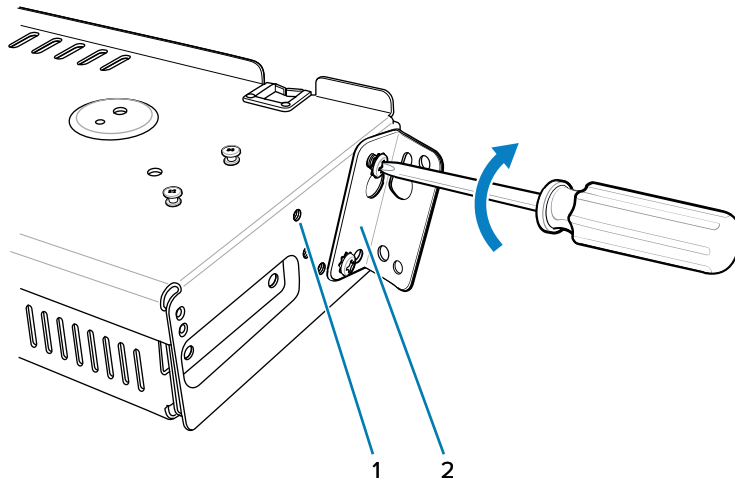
Flange Horizontal Position (4-Slot Cradles)
